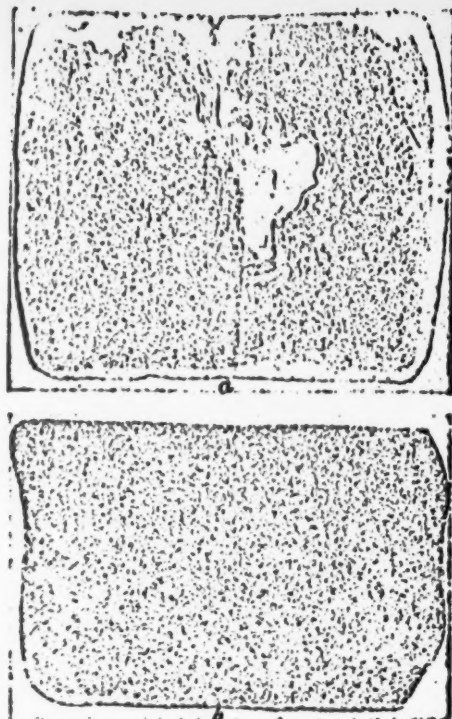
Appearance of fractures of the bottom section of killed steel slabs:
